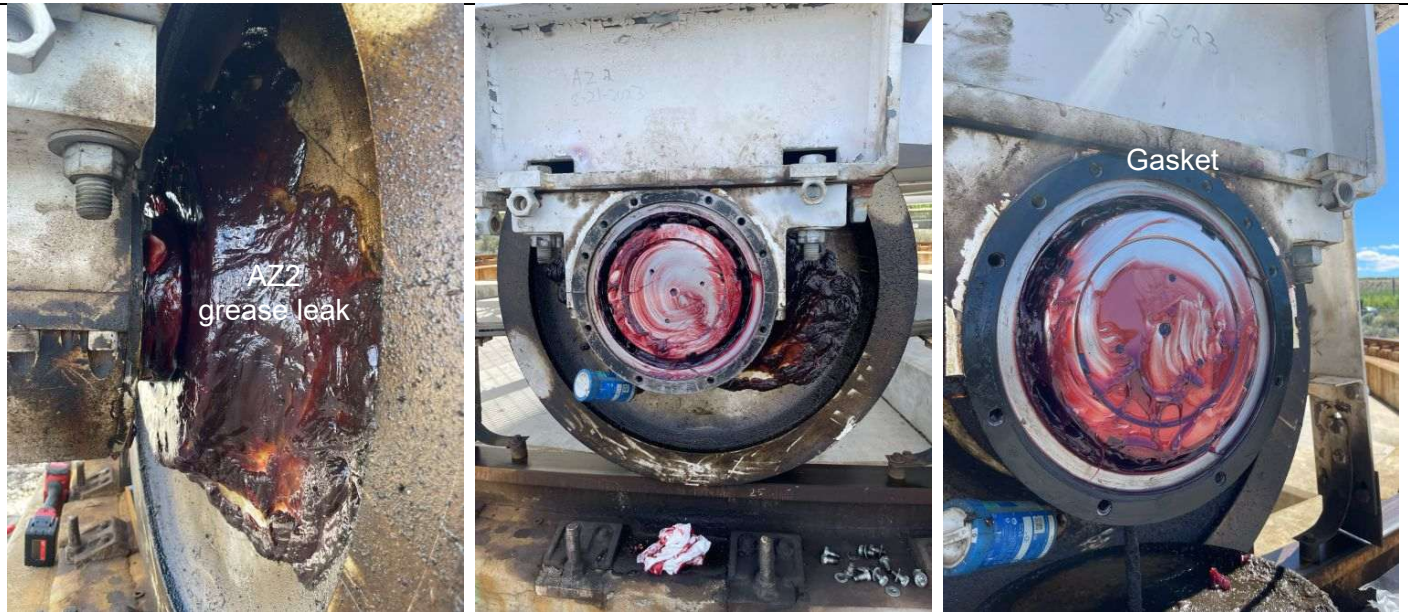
AZ2 drive wheel - bearing leaking, cover removed, and outer rubber gasket installed
